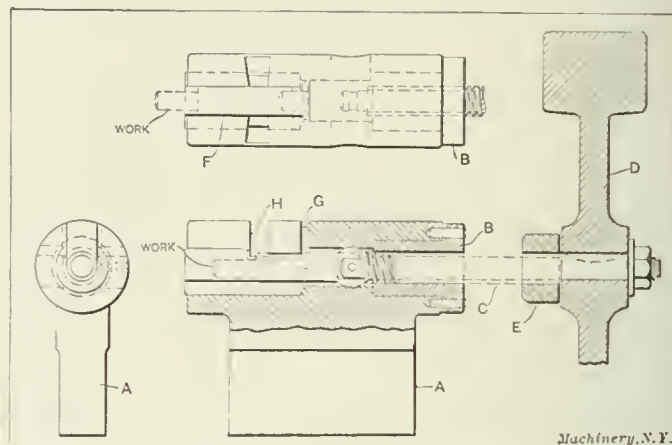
Milling Fixture for Cutting Worm shown in Fig. 2
